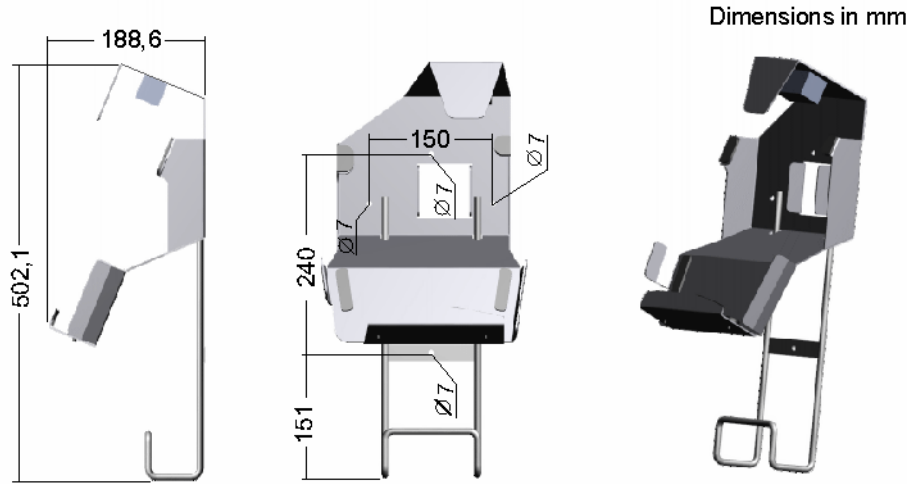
Dimensions and drilling locations for smartPAD holder
